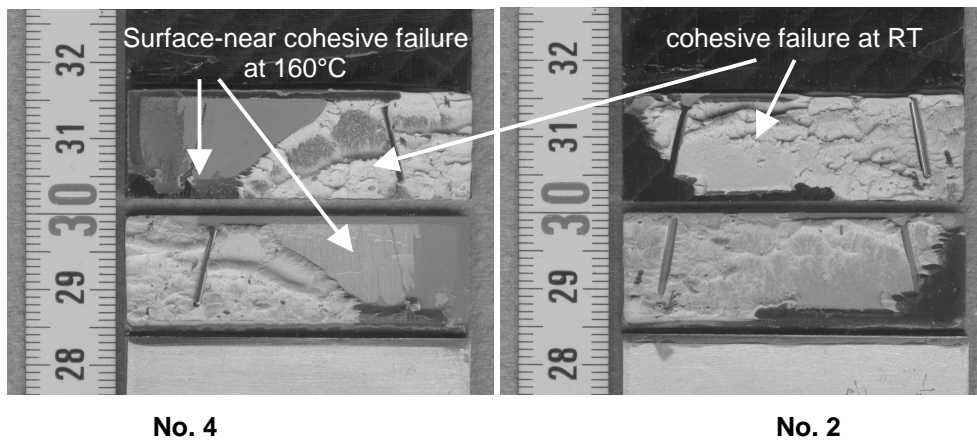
Failure surfaces of lap-shear specimens tested in relaxation test at 75% of deformation at failure.
